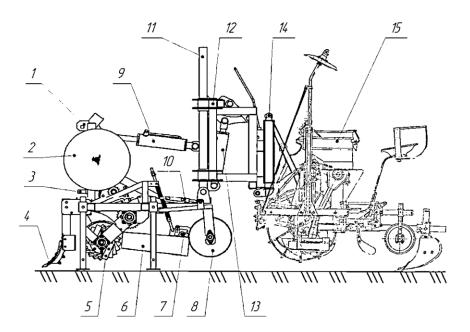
Diagram of a combined machine: 1-hitch for the tractor; 2 - drum for targeted irrigation hose; 3-shaft gearbox; 4-furrow makers; 5-milling drum; 6-apron-former: 7-device for laying a targeted irrigation hose on the ridge; 8-fillet-comb seal; 9 - rod for fastening the seeder mounting device; 10-rods for adjusting the seal; 11-frame device for attaching the seeder; 12-devices for lifting and lowering the hitch of the seeder; 13, 14-hydraulic cylinders; 15-seeder.
